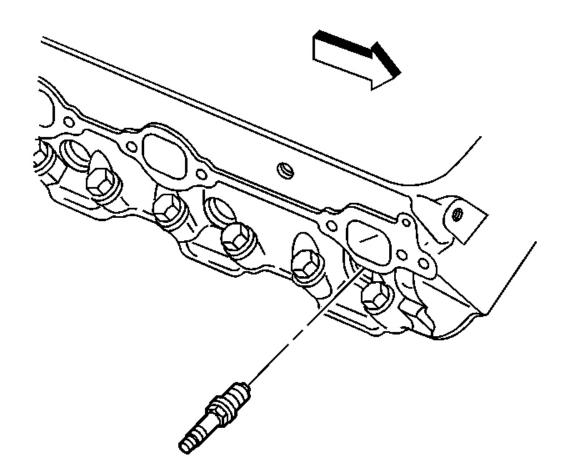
Locating Spark Plugs Courtesy of GENERAL MOTORS CORP.
